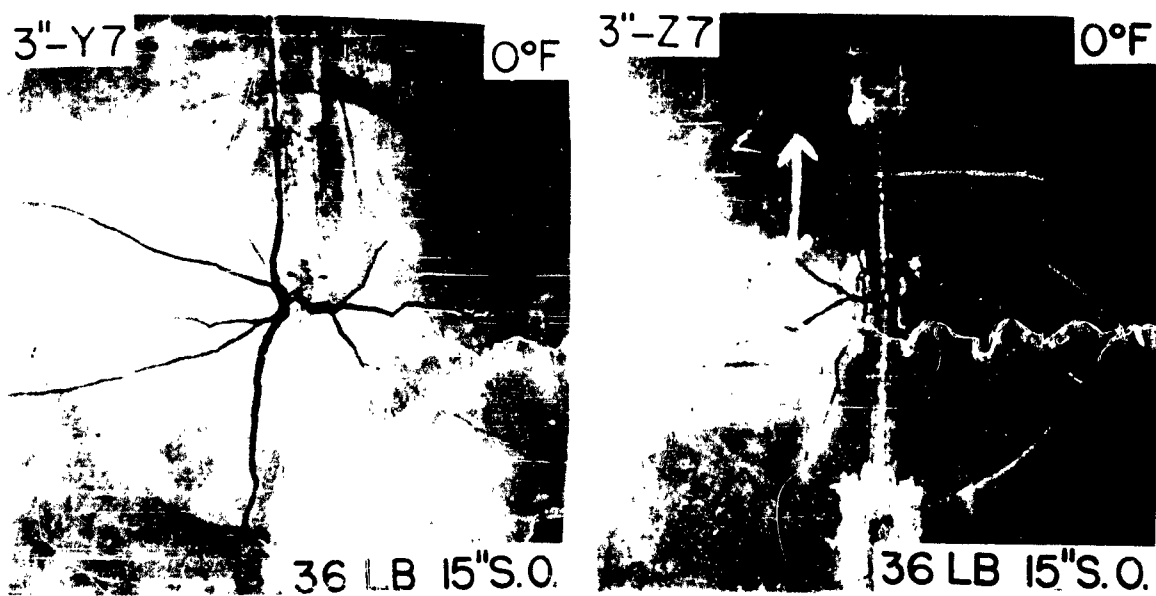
Crack-starter explosion-bulge test plates of 3-in. thick low-alloy HY-80 which developed extensive brittle fractures at 0°F.
